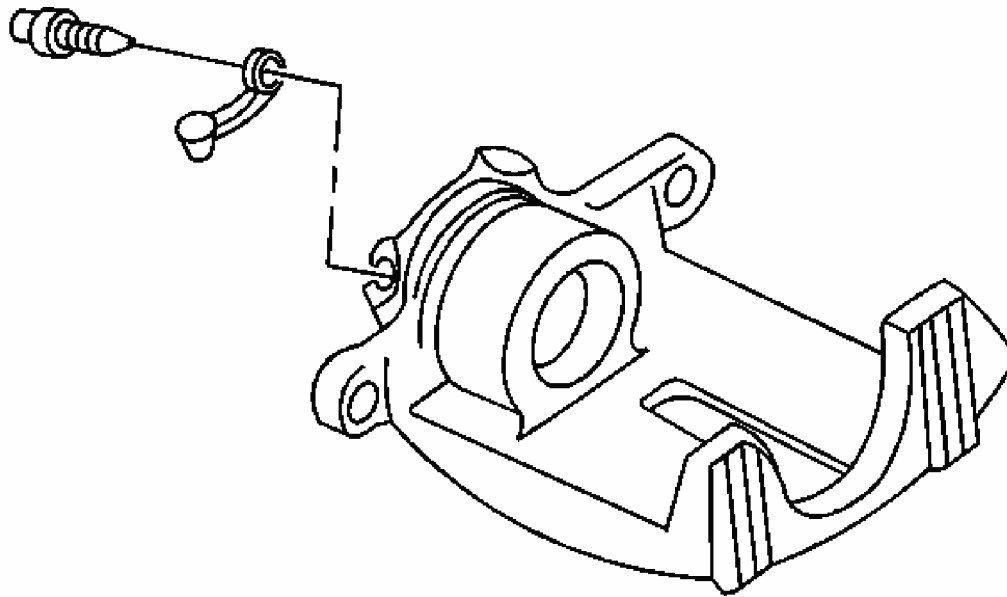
View Of Bleeder Valve & Bleeder Valve Cap
